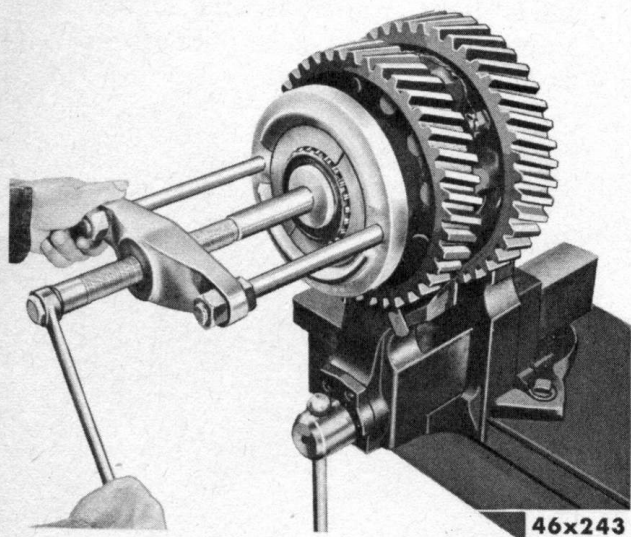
Removing Cross Shaft Bearings, Tool DD-914
